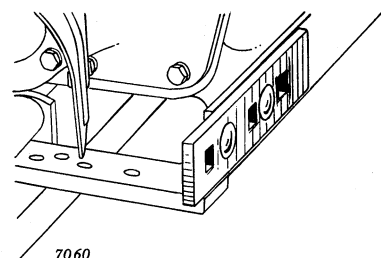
Beam Guide Plate Strap for Model "G" Tractors with Old-Style Drawbars.
